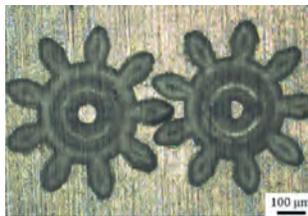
Cavity of micro gears filled with plastic after injection molding.
